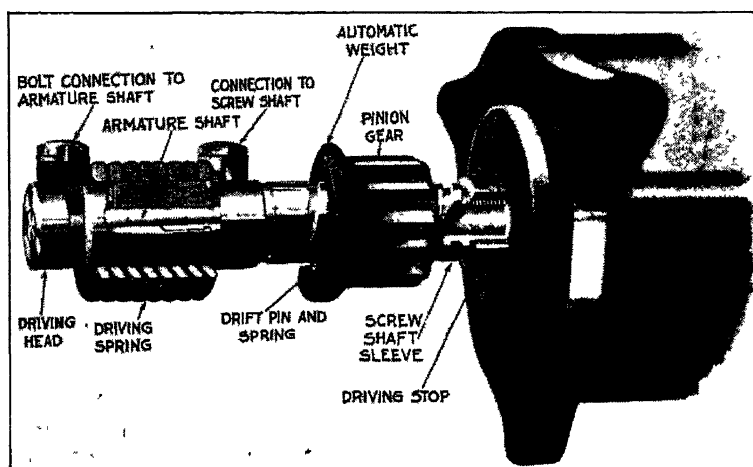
Construction of Eclipse-Bendix drive. Inboard type.
